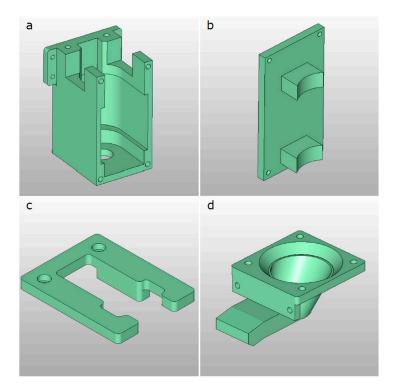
Images of the 3D CAD models (STL files) of the 3D printed printhead components. (a) Printhead_carcass.STL; (b) Front_cover.STL; (c) Syringe_cover.STL; (d) Fan_support.STL.
